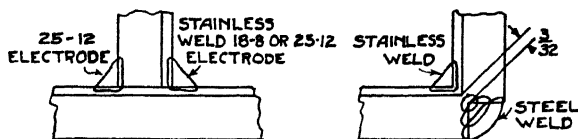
Welding procedure for right angle intersections in construction of stainless clad tanks.
